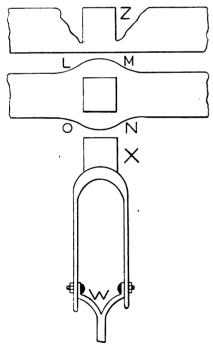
SHOWING METHOD OF FORGING ARM OF GOOSENECK.
